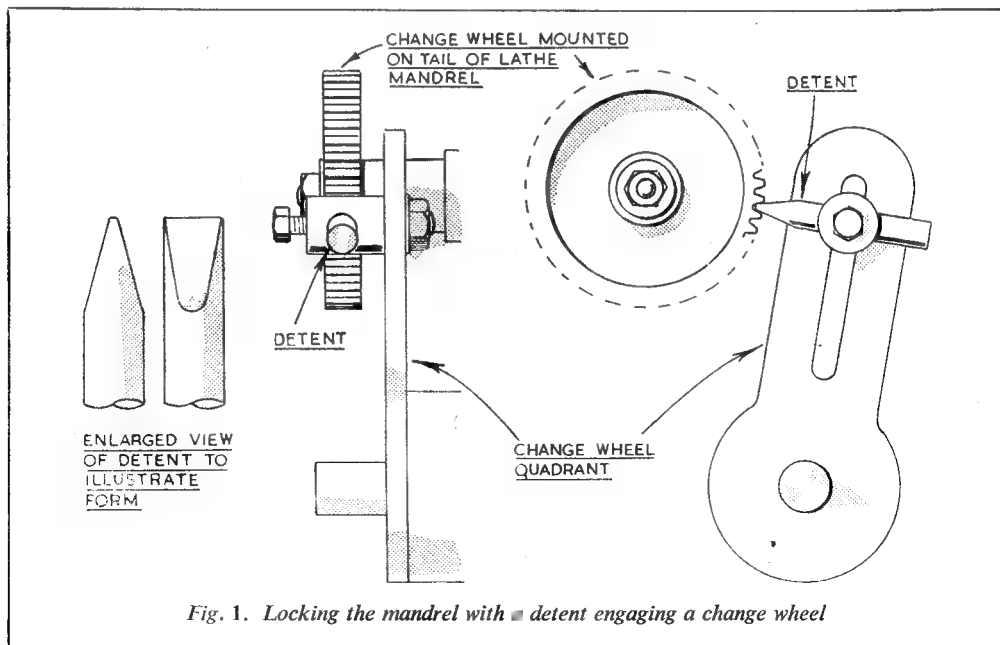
Locking the mandrel with a detent engaging a change wheel
